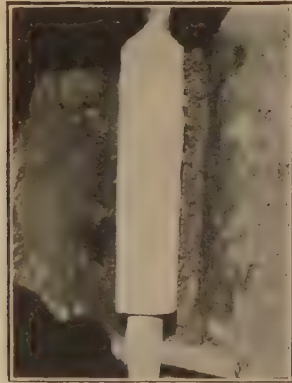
Splice is wrapped with blanket to prevent cooling too quickly.
